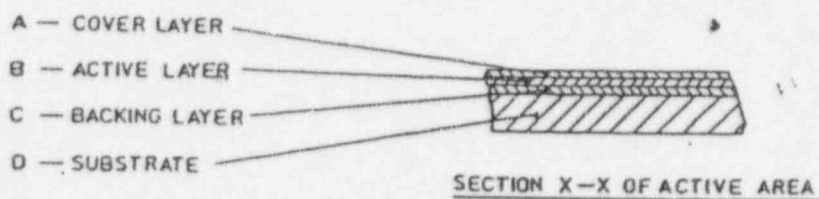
DRAWING OF SEALED SOURCE HOUSING
